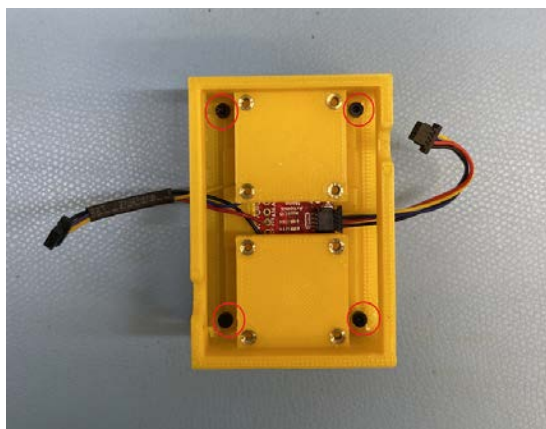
Microcontroller fixture is screwed onto the pressure sensor mount
